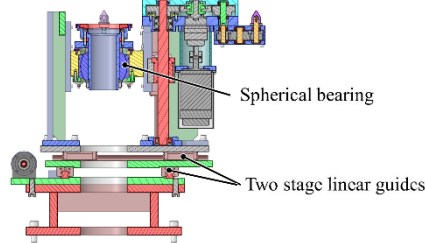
The designed Tool Fixing element is equipped with two stage linear guides for position adjustment and a spherical bearing for angle adjustment
